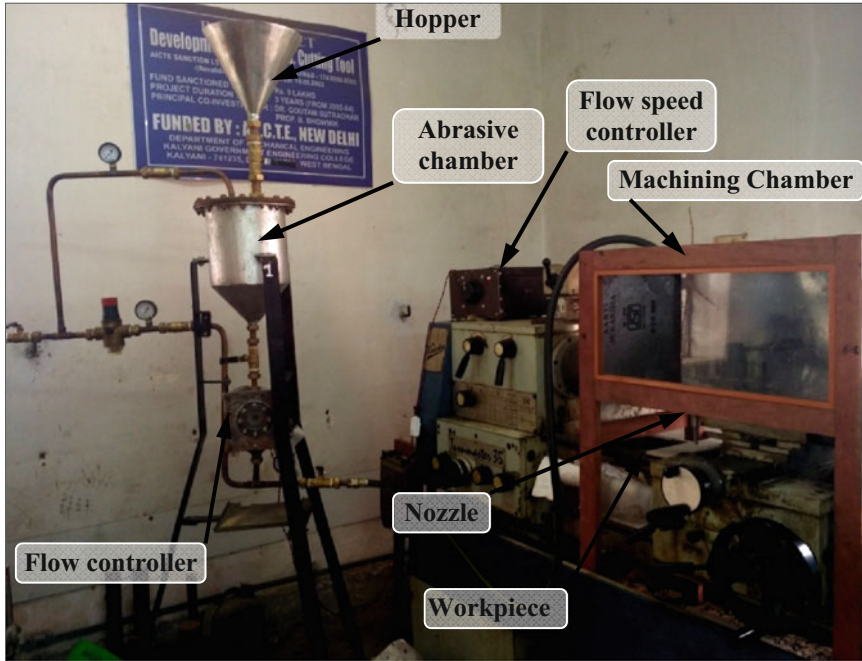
Photograph of the developed abrasive jet processing setup at KGEC, Kalyani, India
